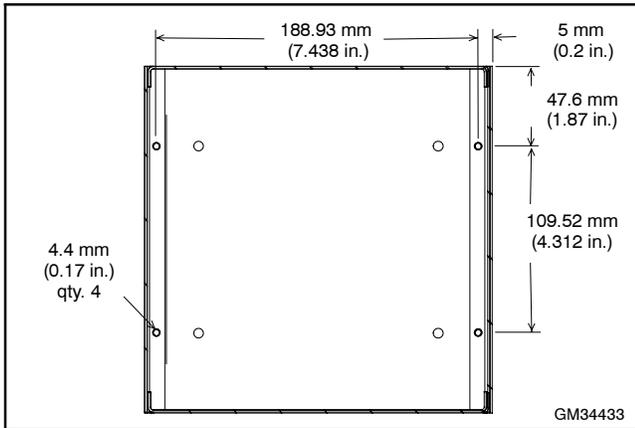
Drilling Mounting Holes in Hoffman Box for RSA II Front Panel Assembly
